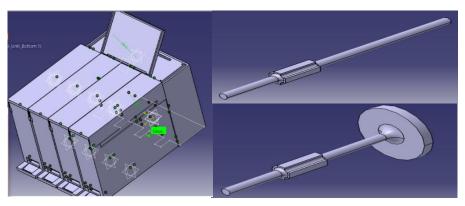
Completed assembly. Top right: Free shaft. Bottom Right: Servo Shaft
